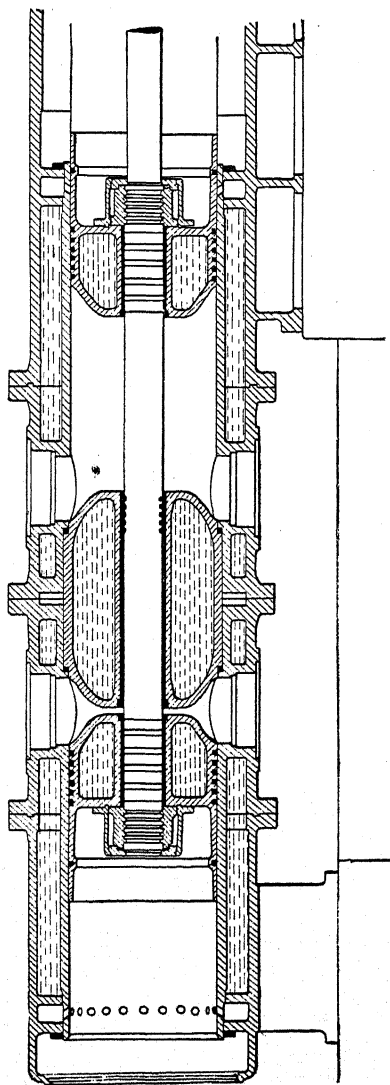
CYLINDER OF THE DOUBLE-ACTING FOUR-CYCLE GAS-ENGINE OF THE DINGLER'SCHE MASCHINENFABRIK, ZWEIBRÜCKEN.
